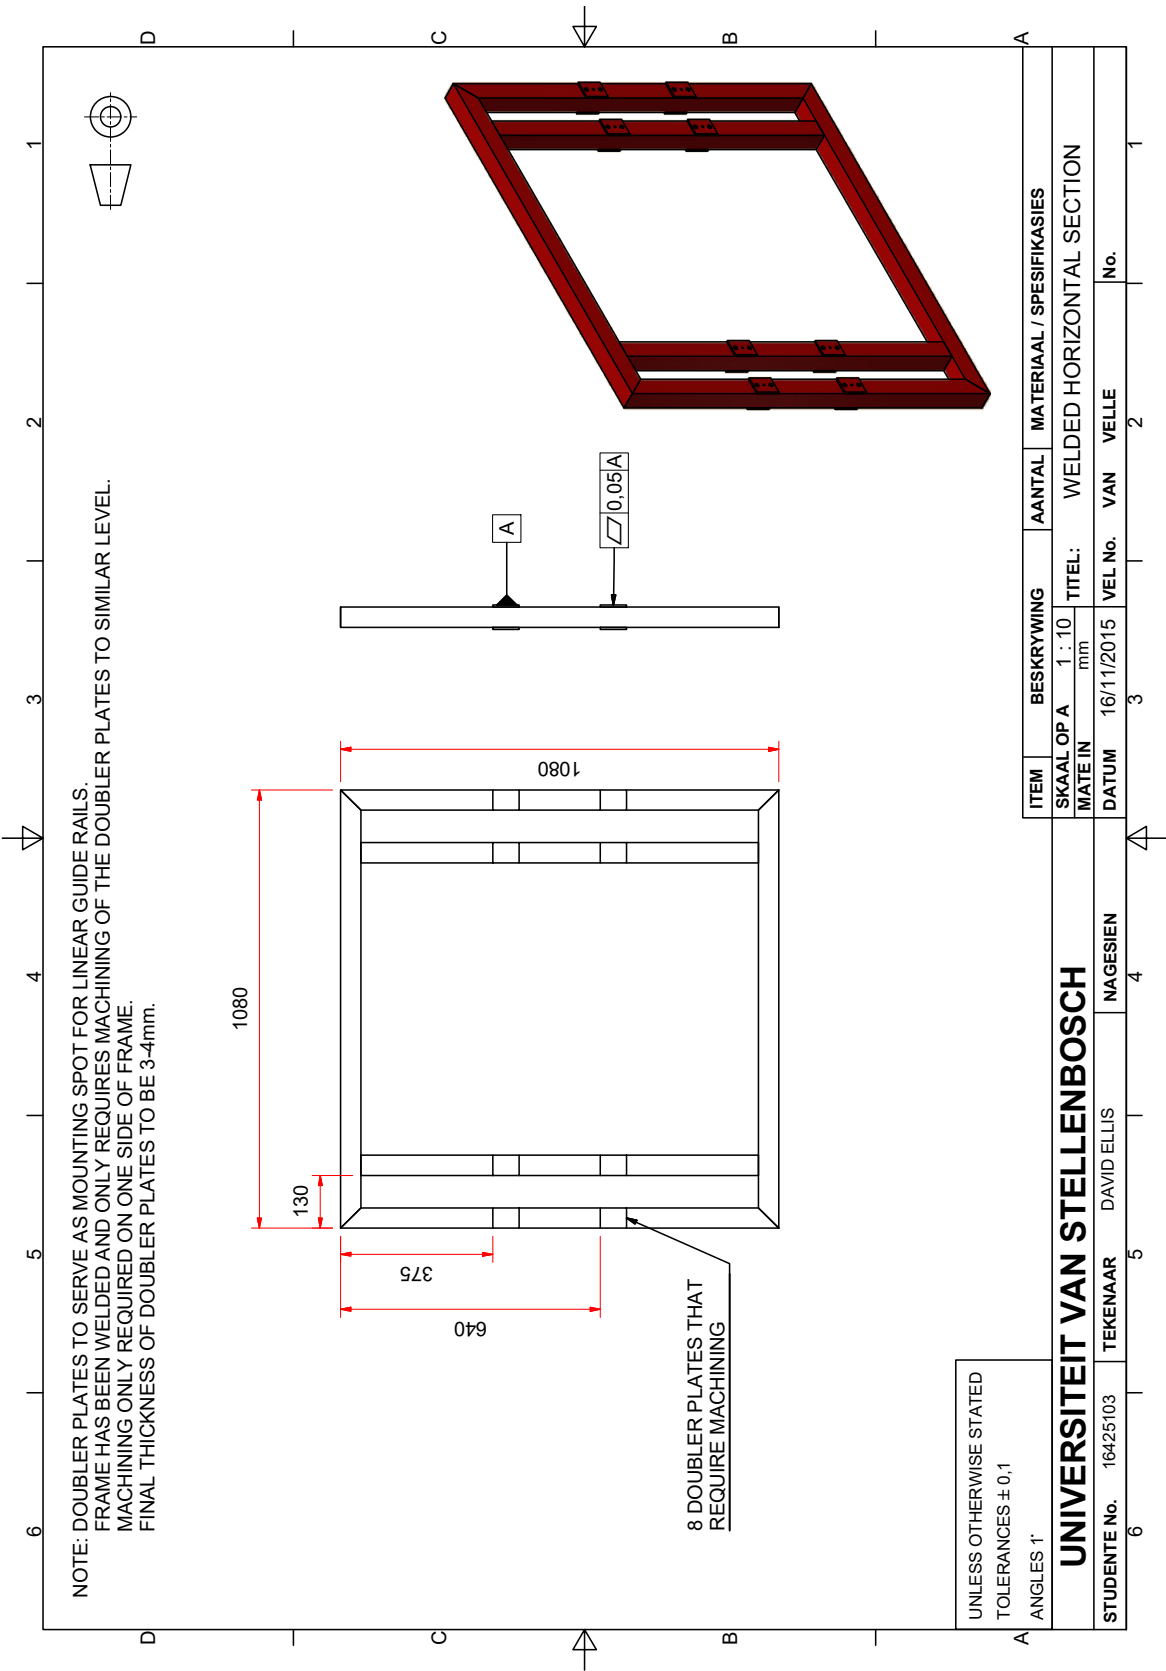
Required machining of doubler plates to which aluminium support blocks are fastened to ensure the geometric tolerance of flatness is met
